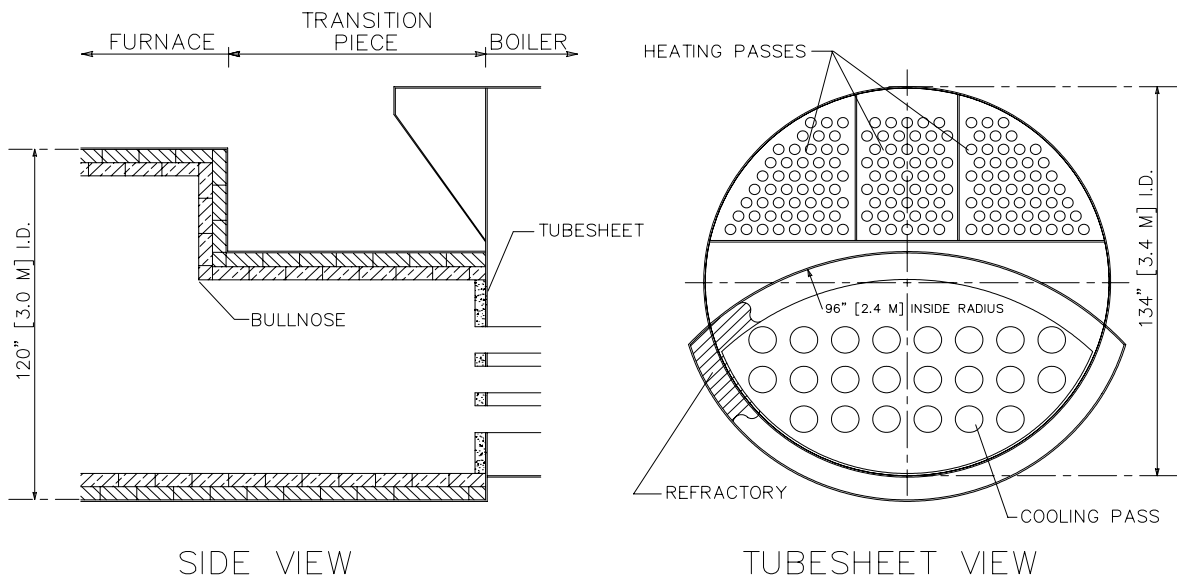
SRU-4/5 Design for Package-Style WHB With a "Fish Mouth" Transition Piece
